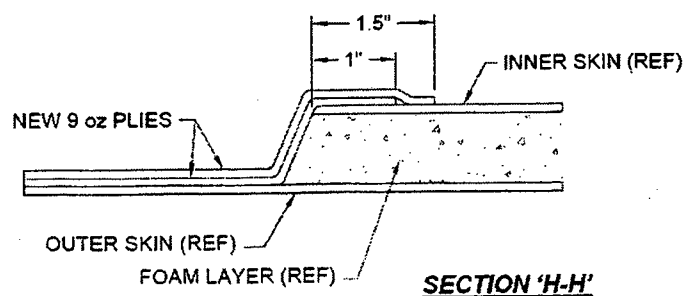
(b) – D3186-2 SPACEPOD™ DOOR COMPOSITE MODIFICATION
